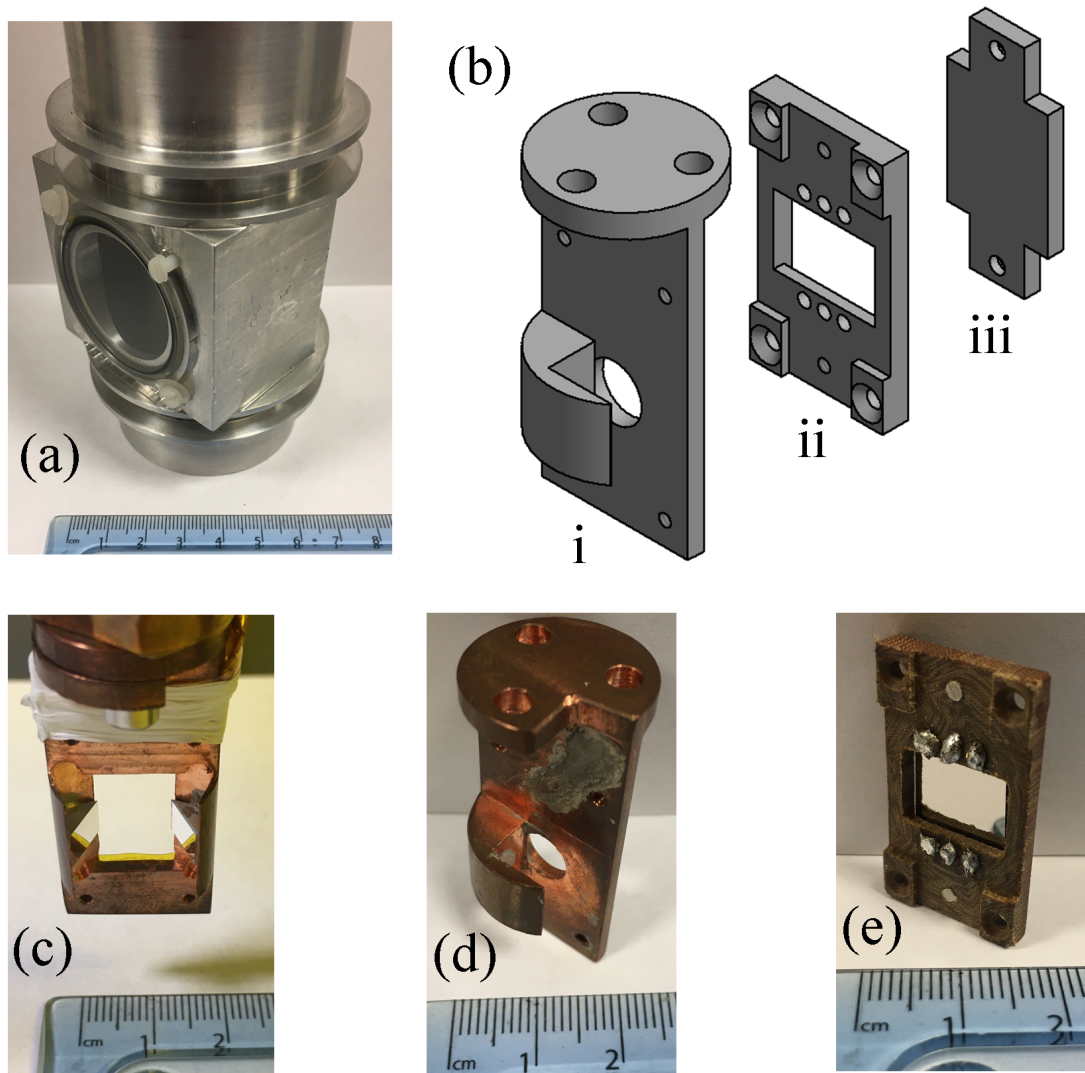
Custom sample environment components for electrical measurements of patterned thin film samples in a helium cold head cryostat. (a) Cryostat vacuum housing. (b) Exploded sample environment diagram. (c) Mirror mount for longitudinal MOKE measurements (replaces part i in (b)). The thermometer used is a Si diode and is held in thermal contact with the Cu sample mount under the white PTFE tape shown in the upper portion of (c). (d) Mirror mount for polar measurements (part i in (b)). (e) Electrically isolated sample mount (part ii in (b)).
